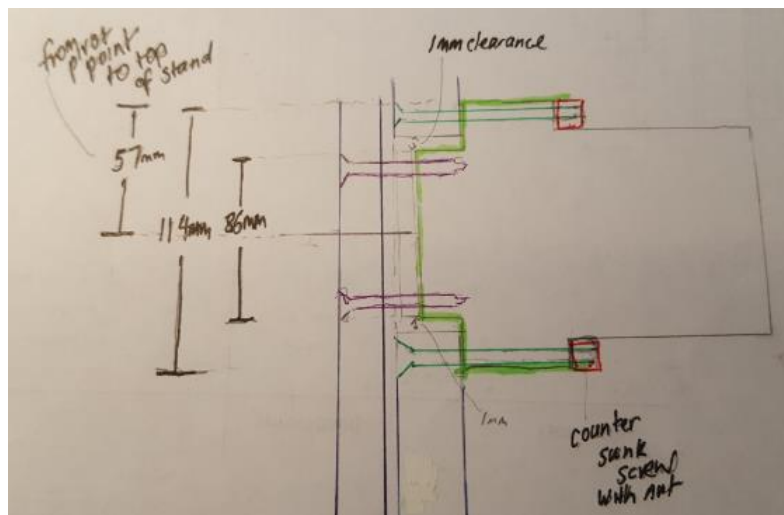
SHA actuator connection to cradle via stand. Countersunk screws used to secure cradle to motor (purple) and motor to stand (green).
